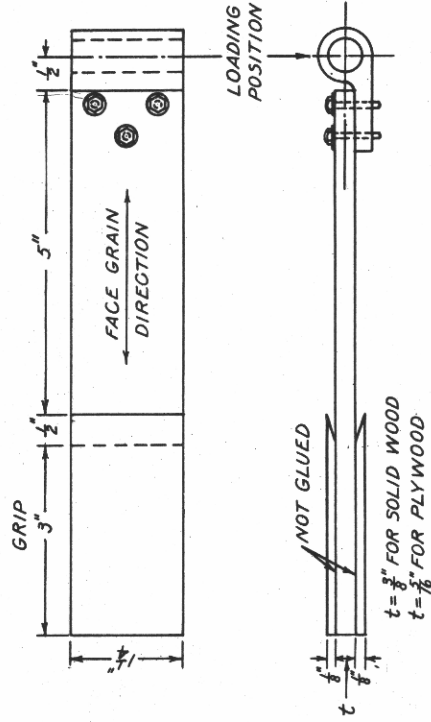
Constant-width type of specimen as used in all tests reported. Revealed wood strips not glued to specimen.
